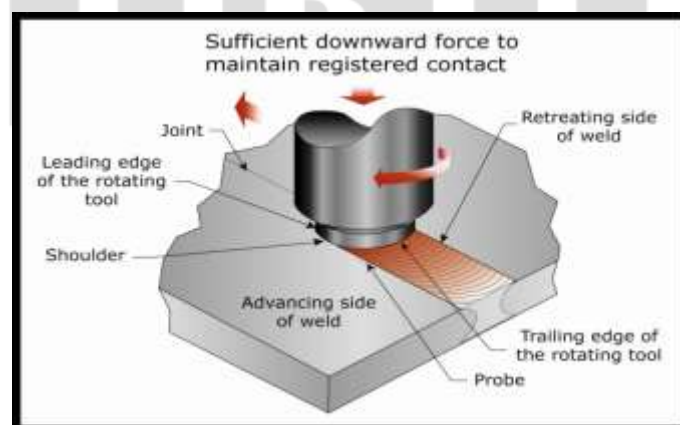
Schematic diagram of the Friction Stir Welding process
